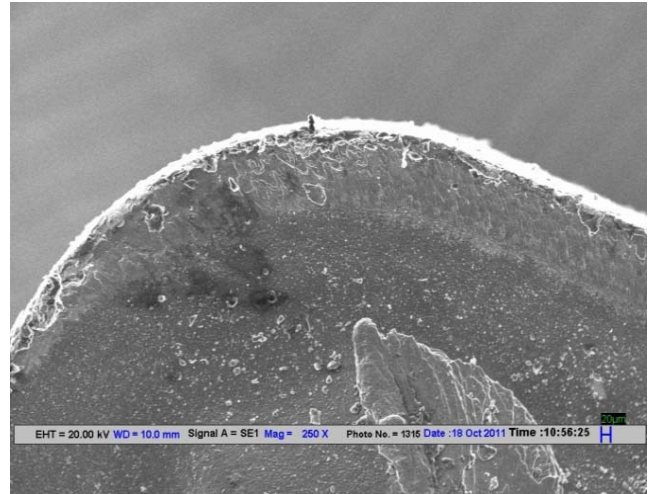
SEM micrograph of cutting tool insert under the following cutting conditions: V=100 m/min; f = 0.12 mm/rev and doc =1.7 mm and 0 degess rake angle
